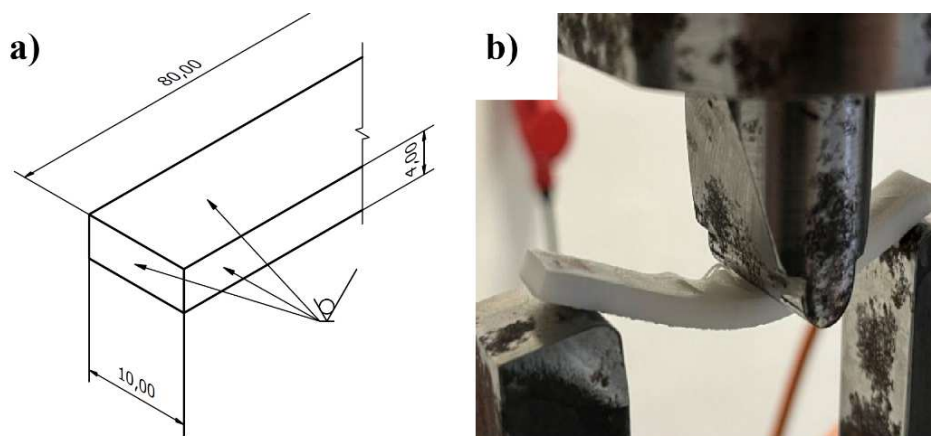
a) Sample dimensions in mm for three-point bending test according to the standard ISO 178:2019; b) Testing of the sample in the flexural fixture of the testing machine Zwick Roell Z100
